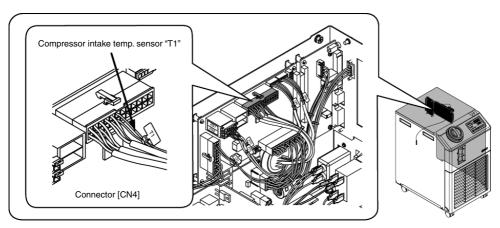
Check the connection of the compressor intake temperature sensor
